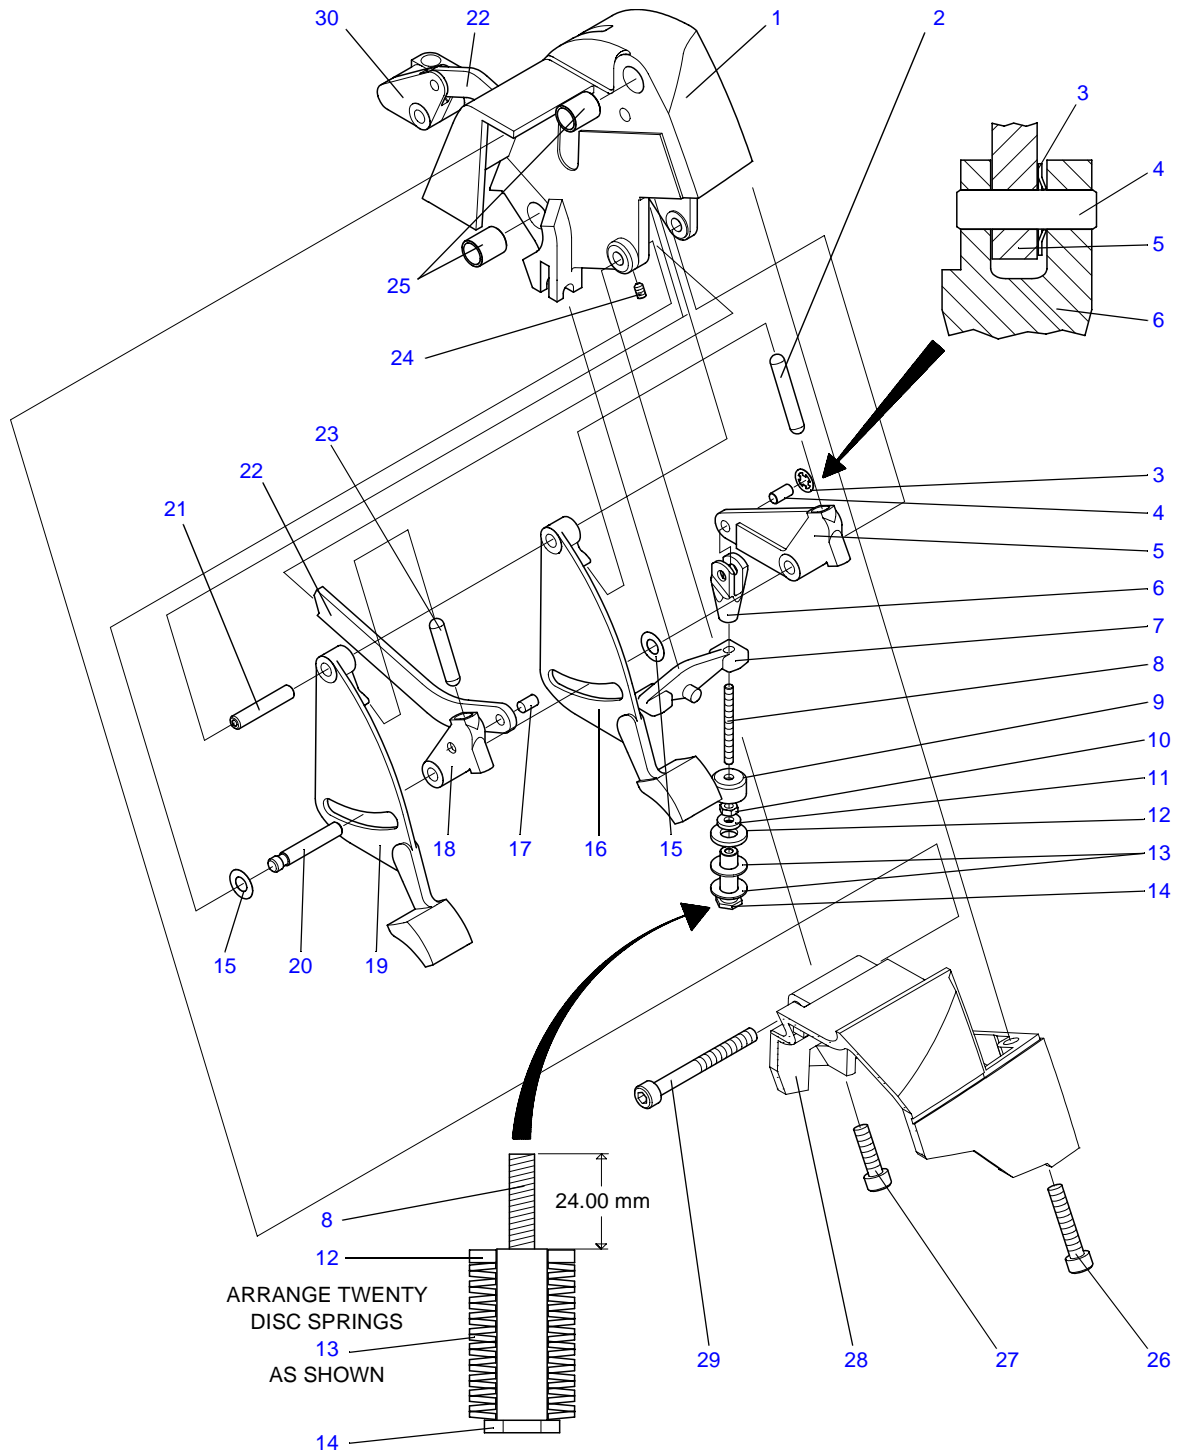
Vector 70/70H Pan and Tilt Head - Pan Drag/Brake Mechanism
